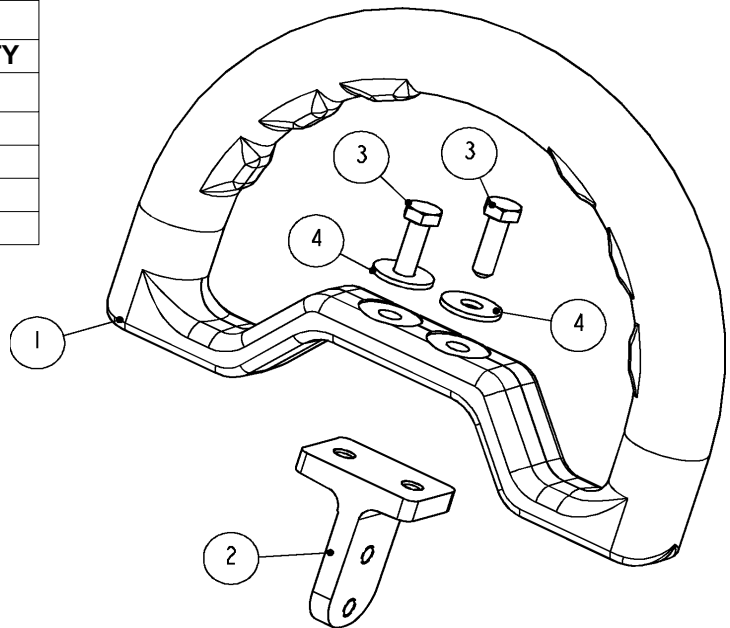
1902500: FRONT HANDLE ASSEMBLY
